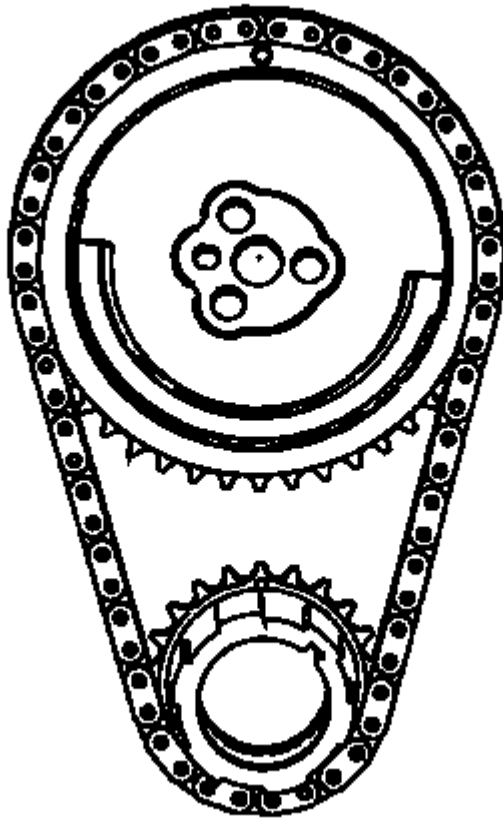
Camshaft And Crankshaft Sprocket Alignment Marks
